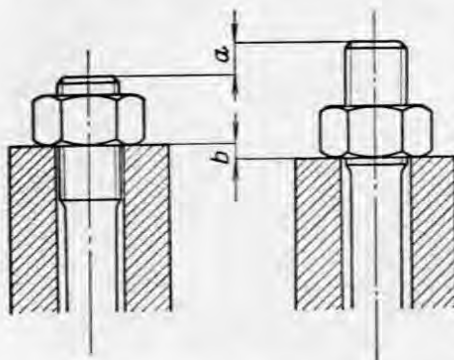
By screwing up the nut the bolt is expanded by  $a$ , and the washer compressed by  $b$ .
